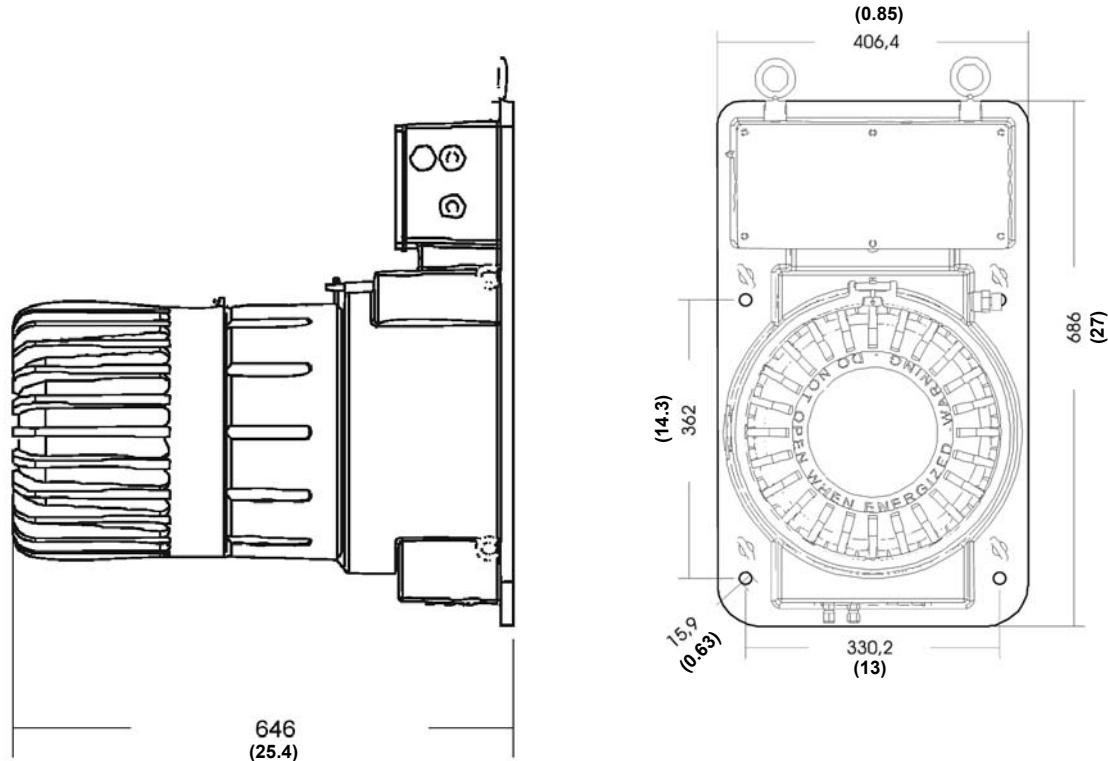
Dimensional sketch / Drill drawing CAT 200 [all dimensions in mm (Inch)]
